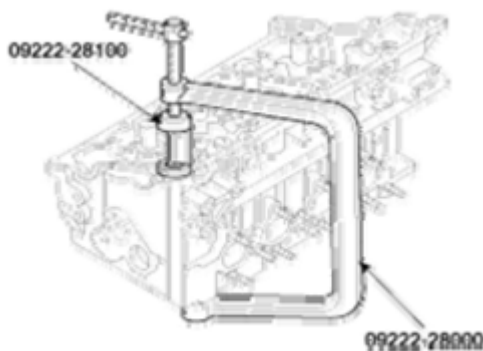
Compressing Valve Spring & Installing Retainer Locks Using SST
